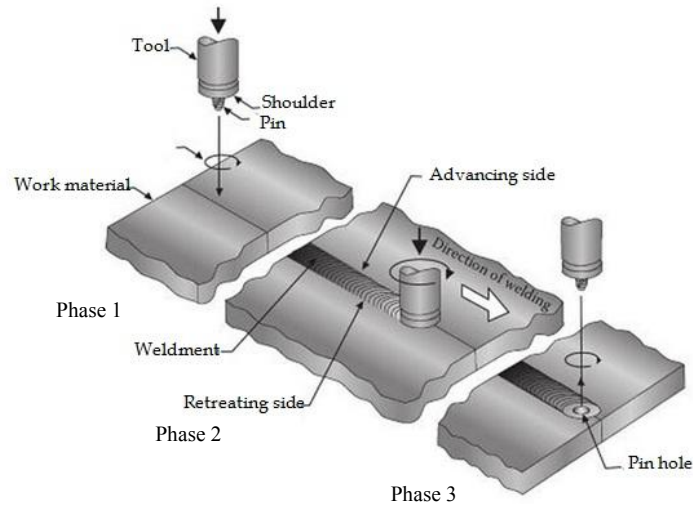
FSW process phases; 1) Plunging, 2) Dwelling, 3) Welding and 4) Exit (American Welding Society, 2007)
